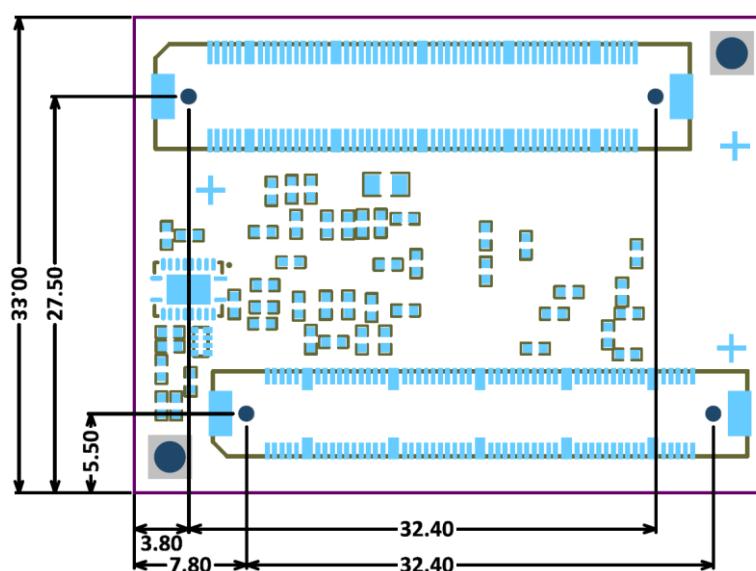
Mechanical outline and Bottom Connectors (bottom view)
